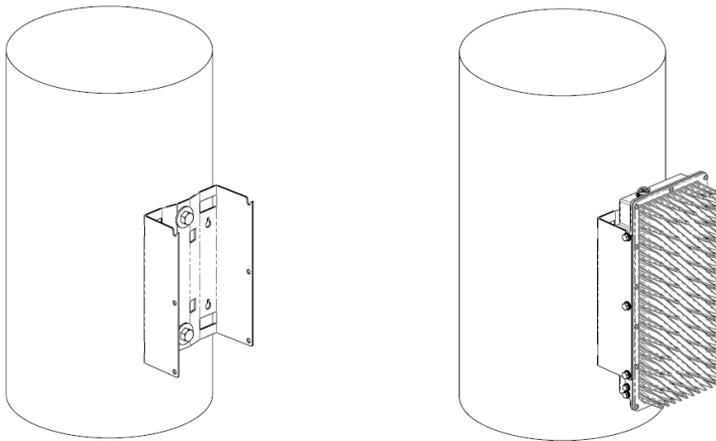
Mounting the DPX 1500 W downconverter to a wooden pole
